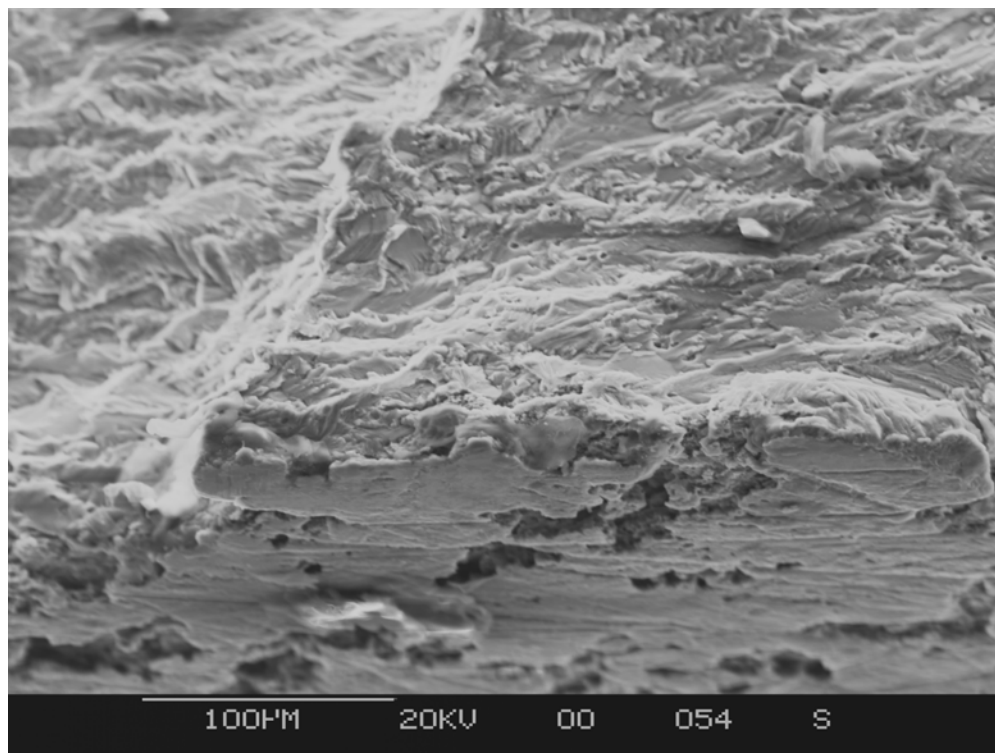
Surface View of Crack Origin B on Specimen 5967.
